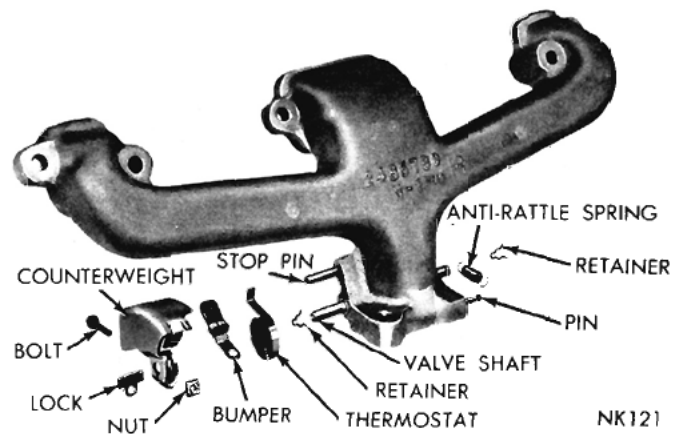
Manifold Heat Control Valve (273 Cu. In. Engine)
